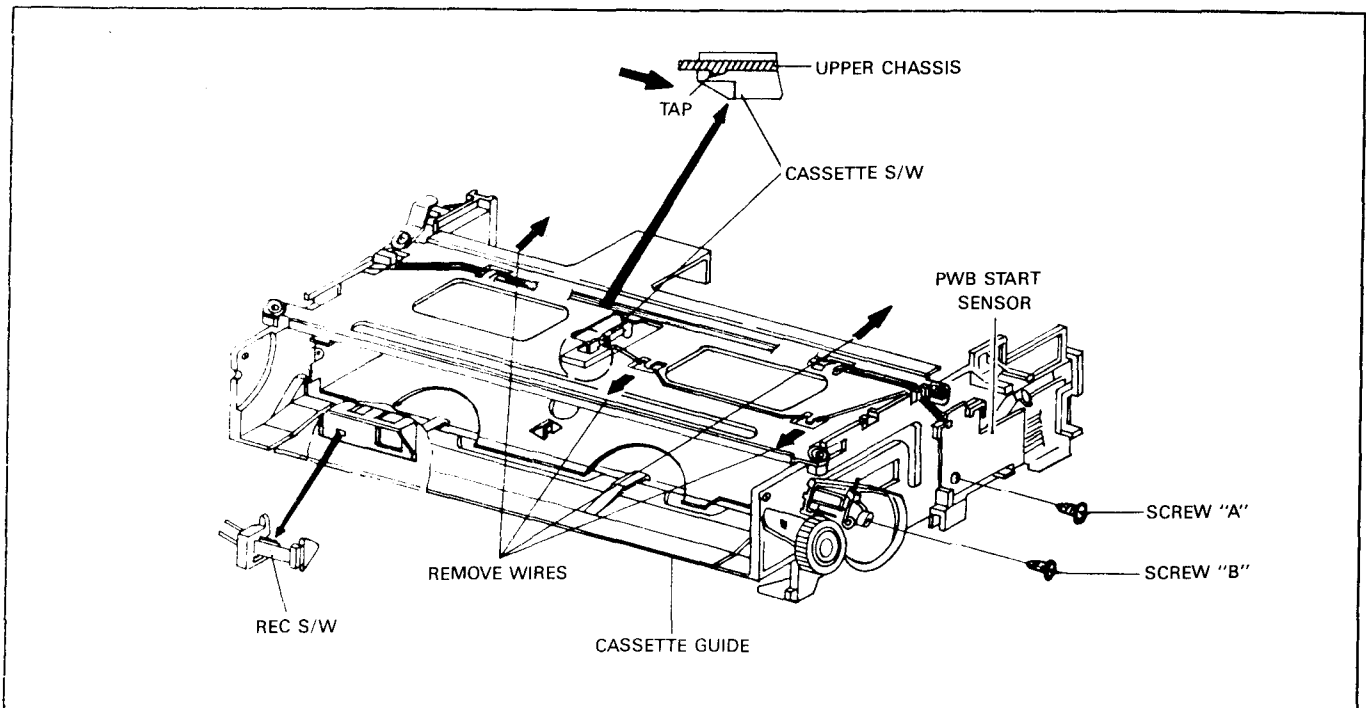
Rec S/W / Cassette S/W / Pwb Start Sensor / Side Arm (R) Removal
